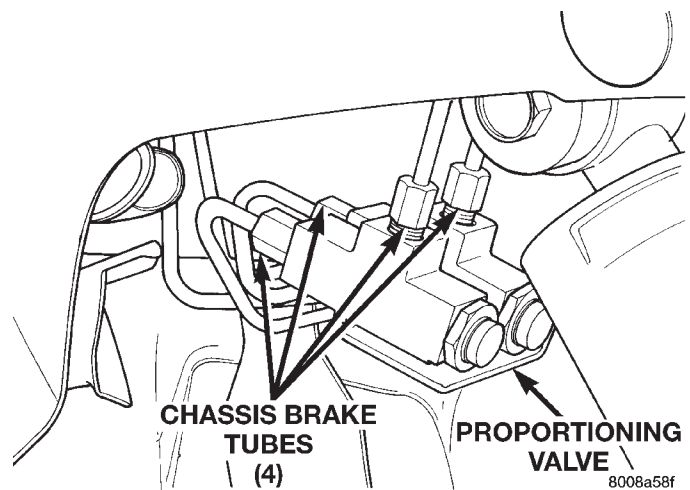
Chassis Brake Tubes At Proportioning Valve
